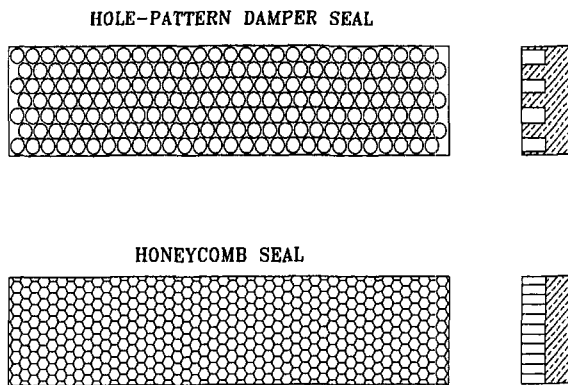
The surface configuration for hole-pattern damper and honeycomb seal
